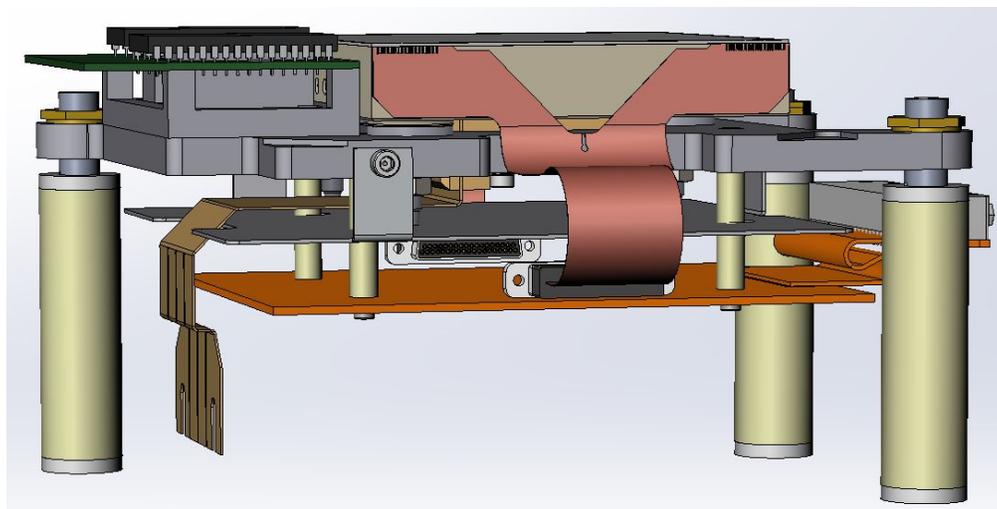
CCD mount assembly containing a CCD231-C6, offset guide and focus detectors, amplifier PCB, and thermal control components.
